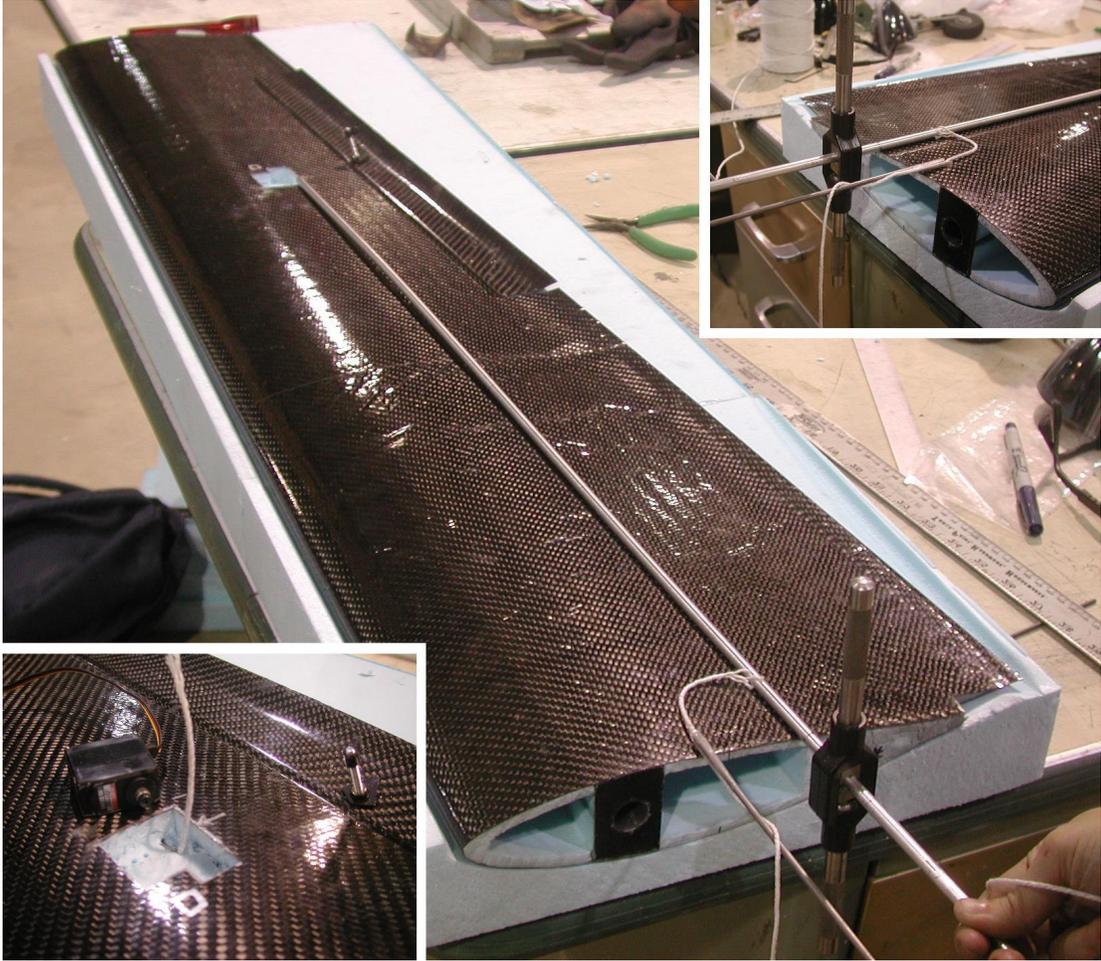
Hand Made Wire Access Tunnel – detail views diagonal corners.
